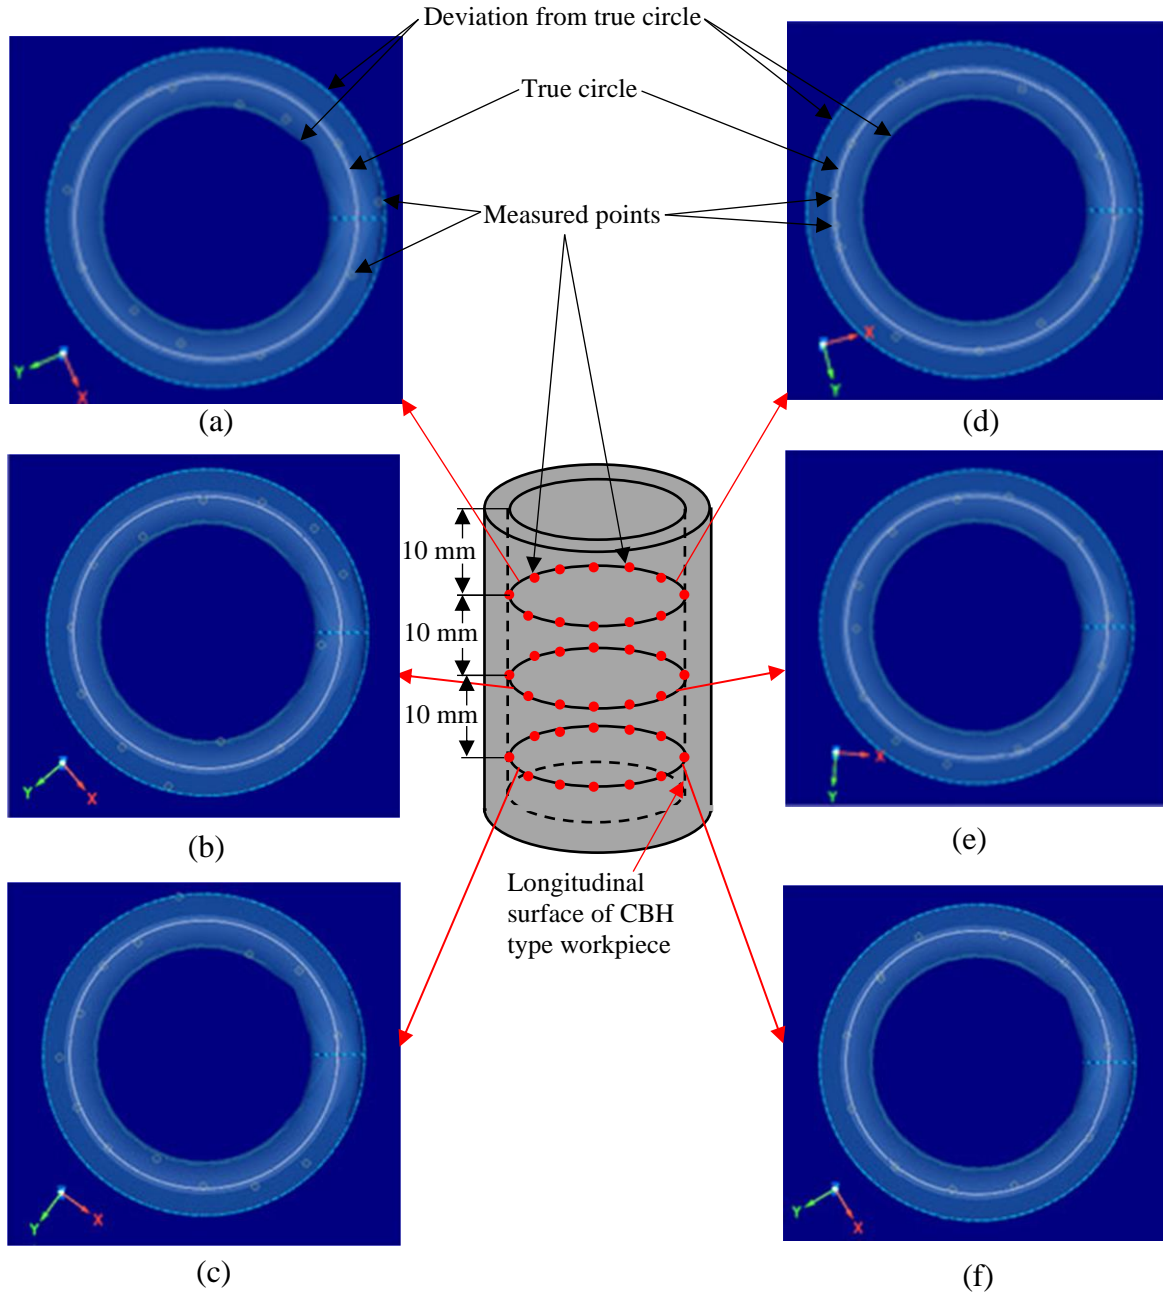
Circularity images of initial ground surface at (a) 10 mm, (b) 20 mm and (c) 30 mm, and final MR finished longitudinal surface at (d) 10 mm, (e) 20 mm and (f) 30 mm of the cylindrical blind hole workpiece after 180 min finishing using the MRG tool with V-grooves.
